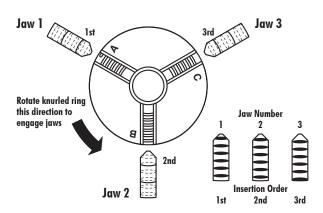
Three-Jaw Chuck, standard jaw locations.
